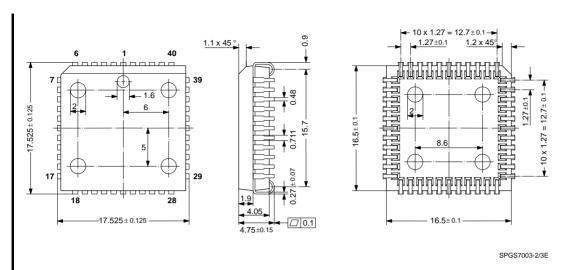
44-Pin Plastic Leaded Chip Carrier Package (PLCC44) Weight approx 2.5 g Dimensions in mm
